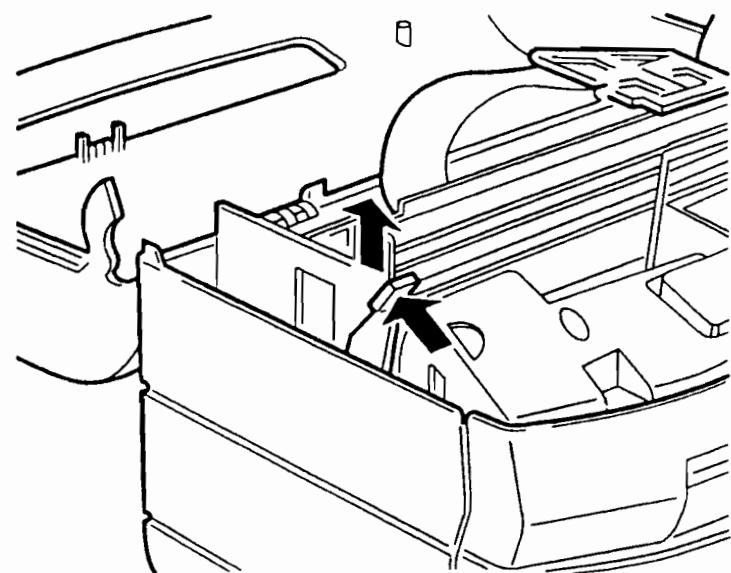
Upper Mechanical Assembly Lifting Lever
